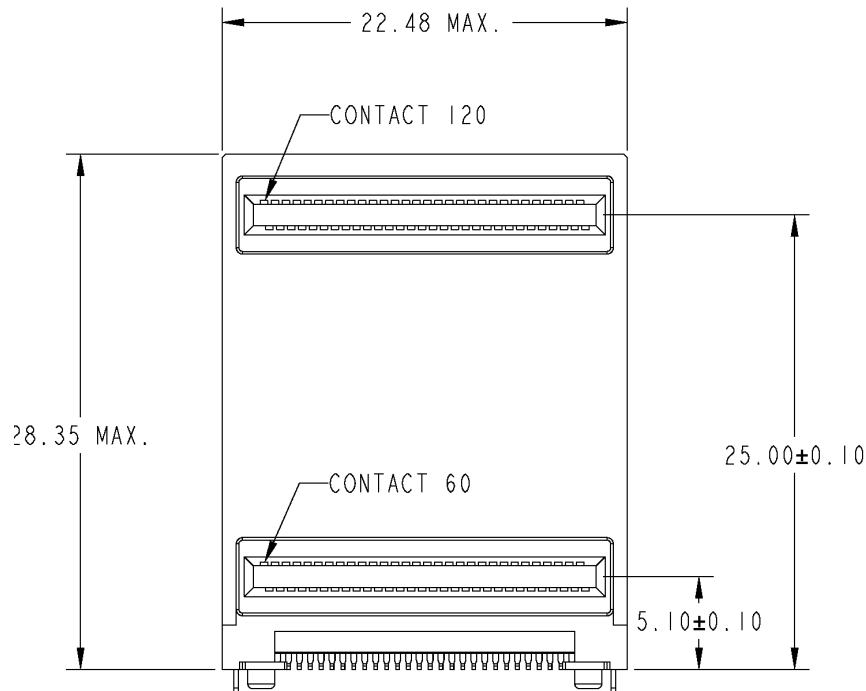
Stacked SMT connector, front view, 19.9mm pitch
